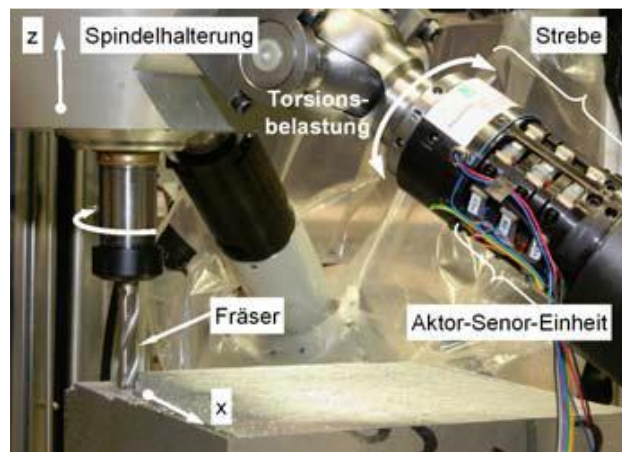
Actuator-sensor unit for torsion compensation of an x, y, z-Tripod-testing machine
